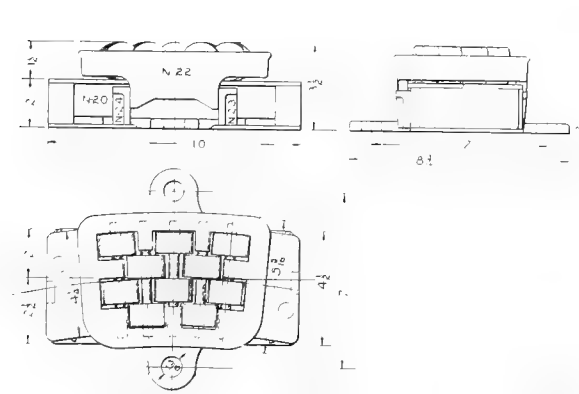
Creco Roller Side Bearing for Freight Cars.
